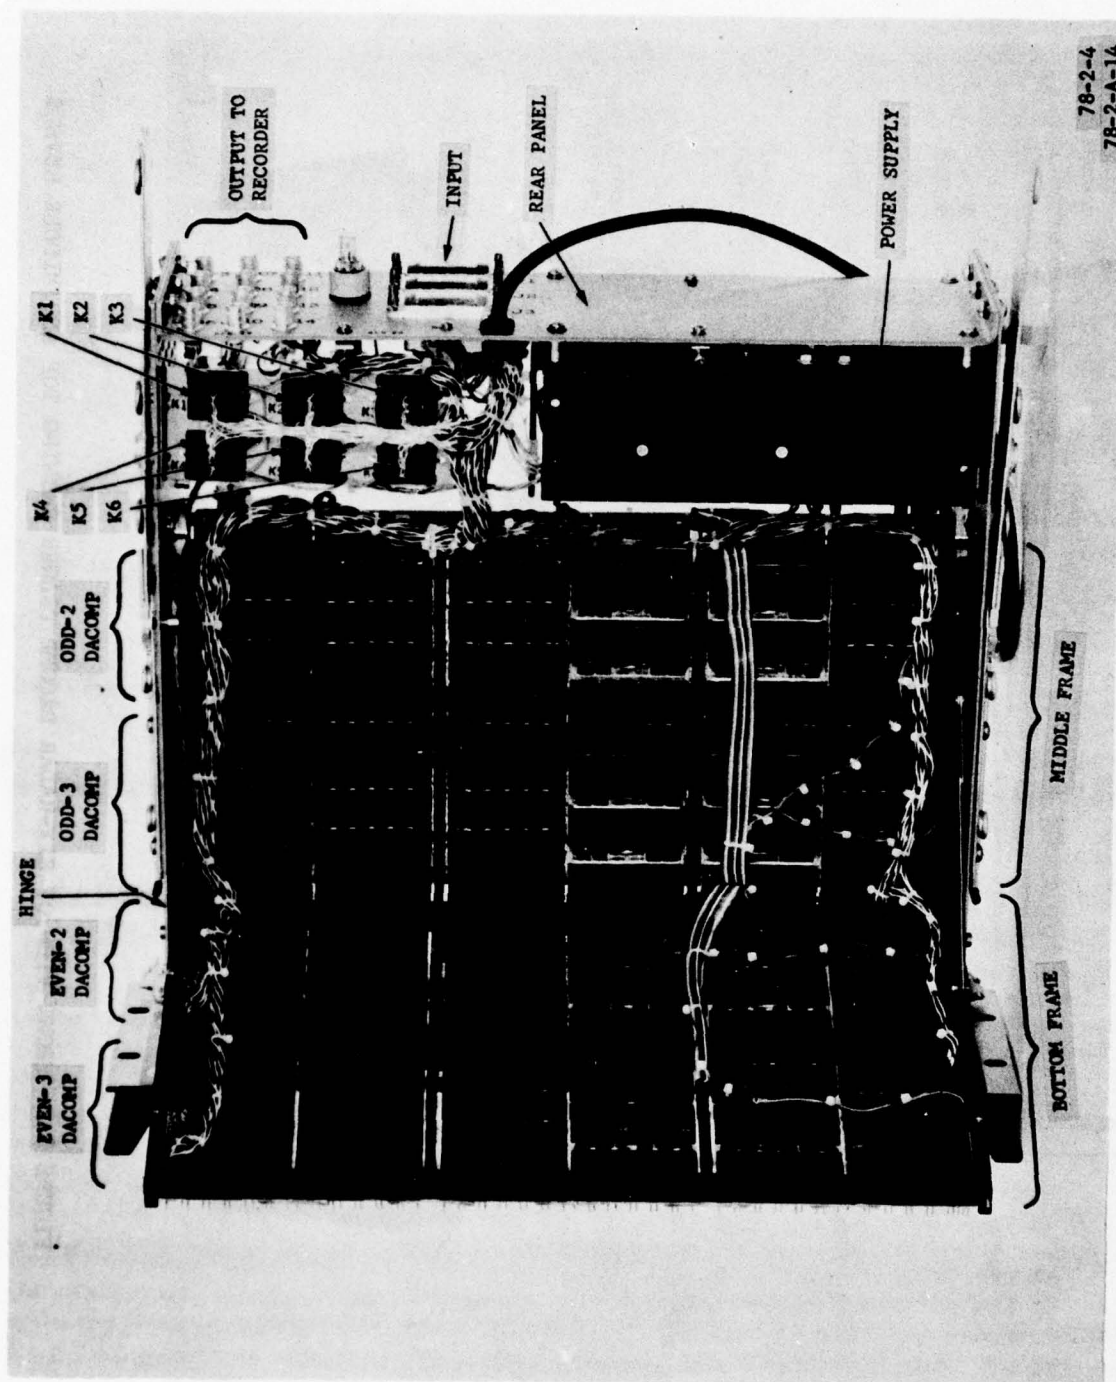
BOTTOM VIEW OF SIX-RADAR DACOMP DRAWER SHOWING MIDDLE AND BOTTOM LEVELS
